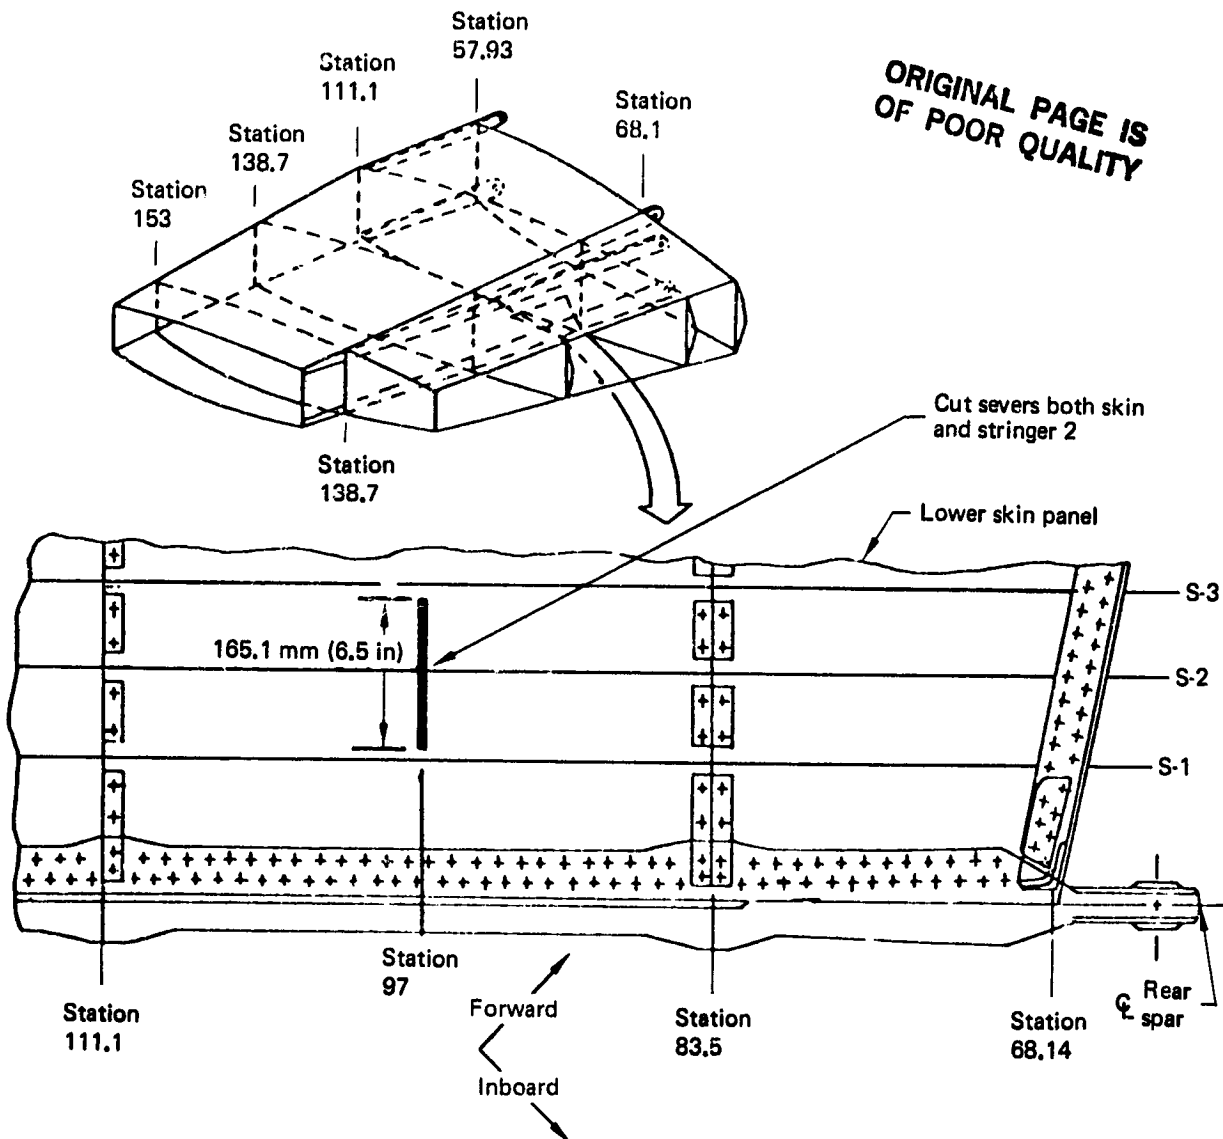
Stub Box Damage Tolerance Test—Lower Surface Skin and Stringer
